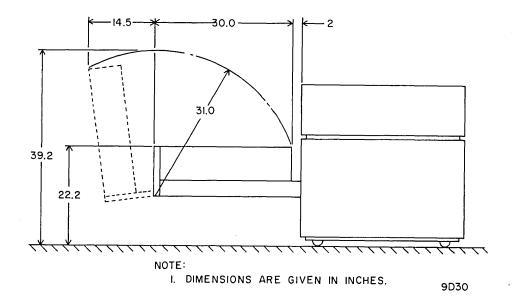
Cabinet With Drawer Mount Space Requirements
